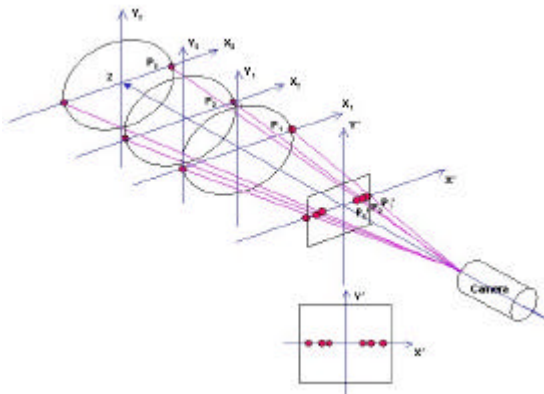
Concept of the visual inspection for the tube internal.
